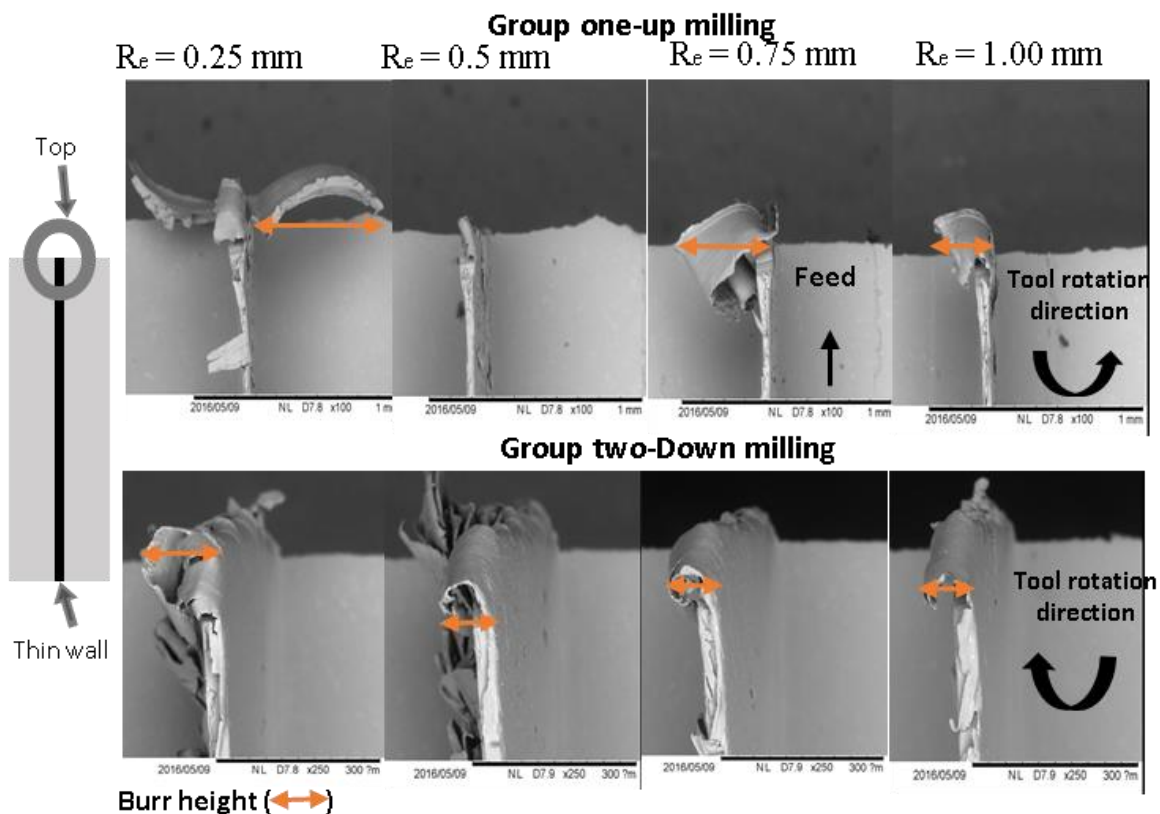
Top view of thin walls machined using up and down milling technology at the tool exit position
